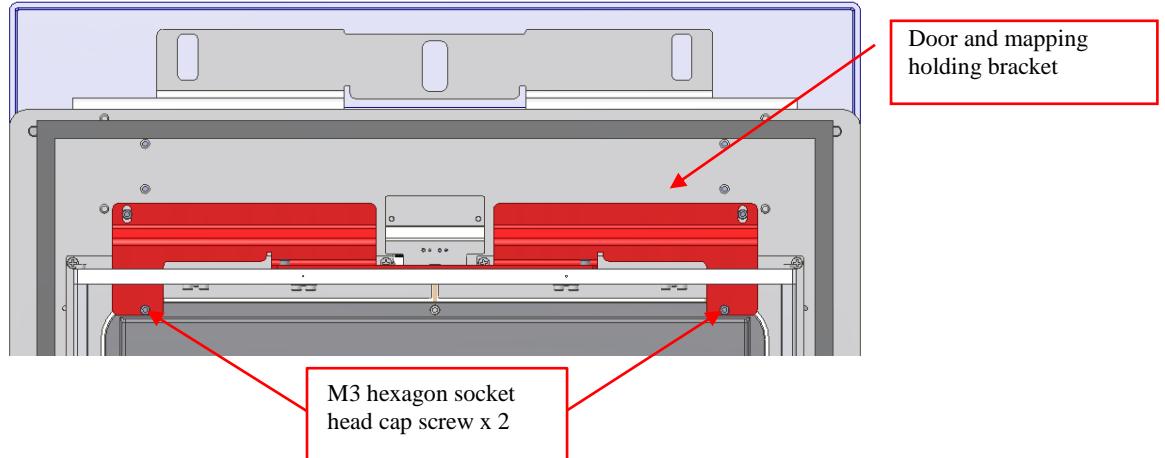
6 Removal of Door and Mapping Holding Bracket 1
